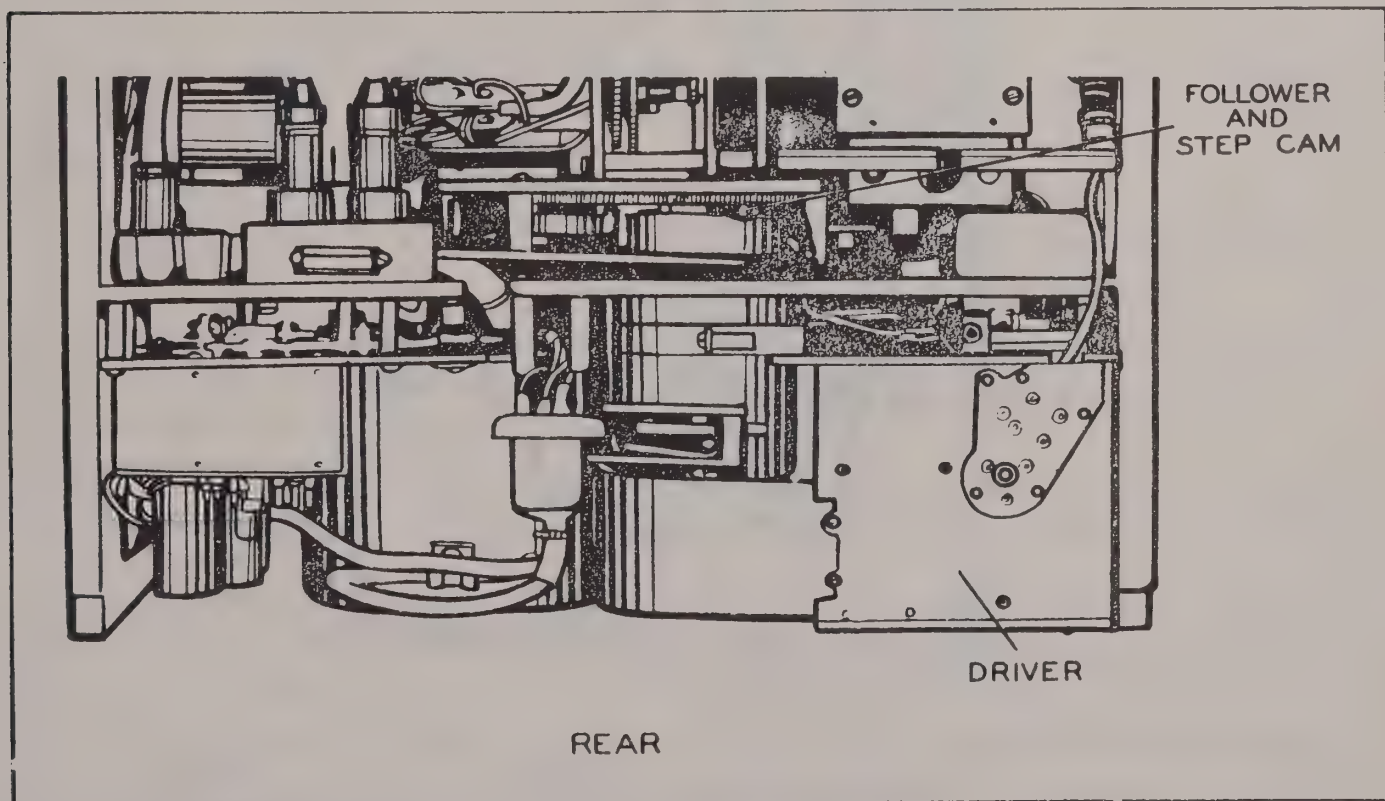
Radio Transmitter T-217A/GR, Partial Bottom View, Cover Removed.
